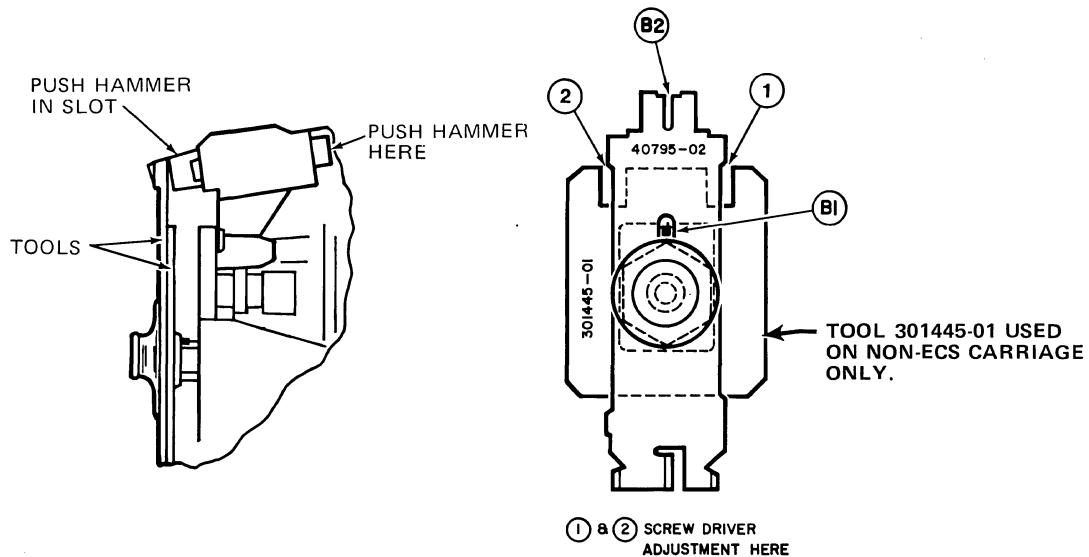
PRINT WHEEL TO HAMMER ALIGNMENT
